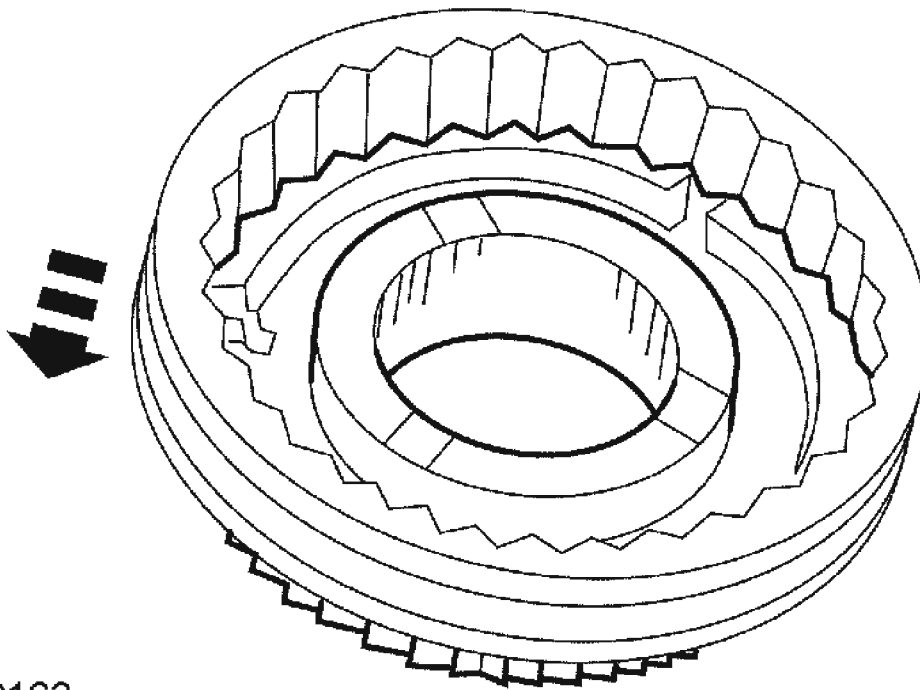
Identifying Synchronizers Spring And Ring Component
